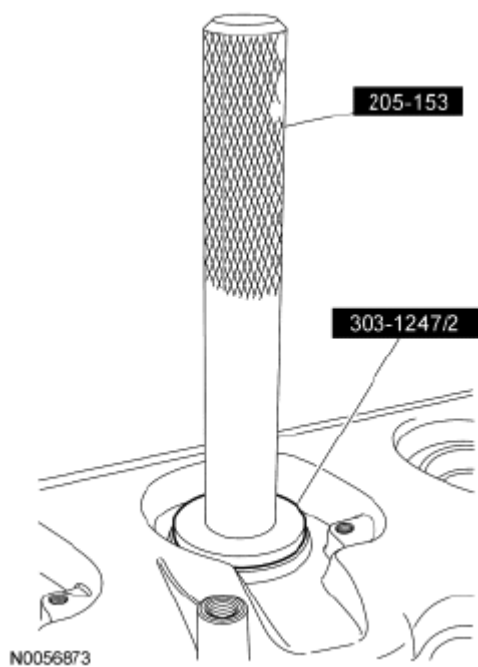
Identifying VCT Spark Plug Tube Seal Installer And Handle
